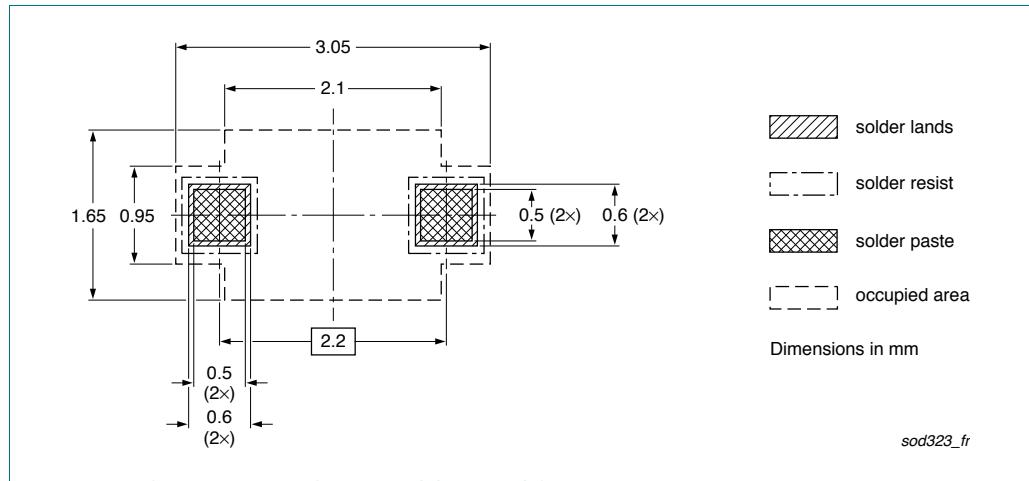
Reflow soldering footprint SOD323 (SC-76)
